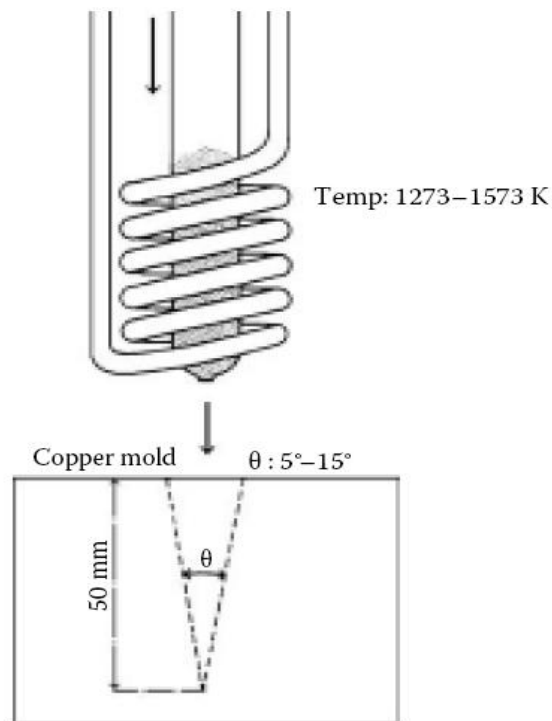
Schematic drawing of the equipment used to prepare Bulk MG by the copper mold casting technique.
